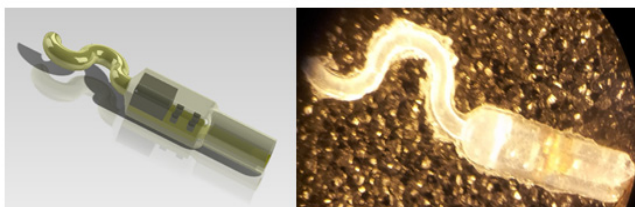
On the left – a CAD drawing of the encapsulated sensor, on the right – an early prototype.
